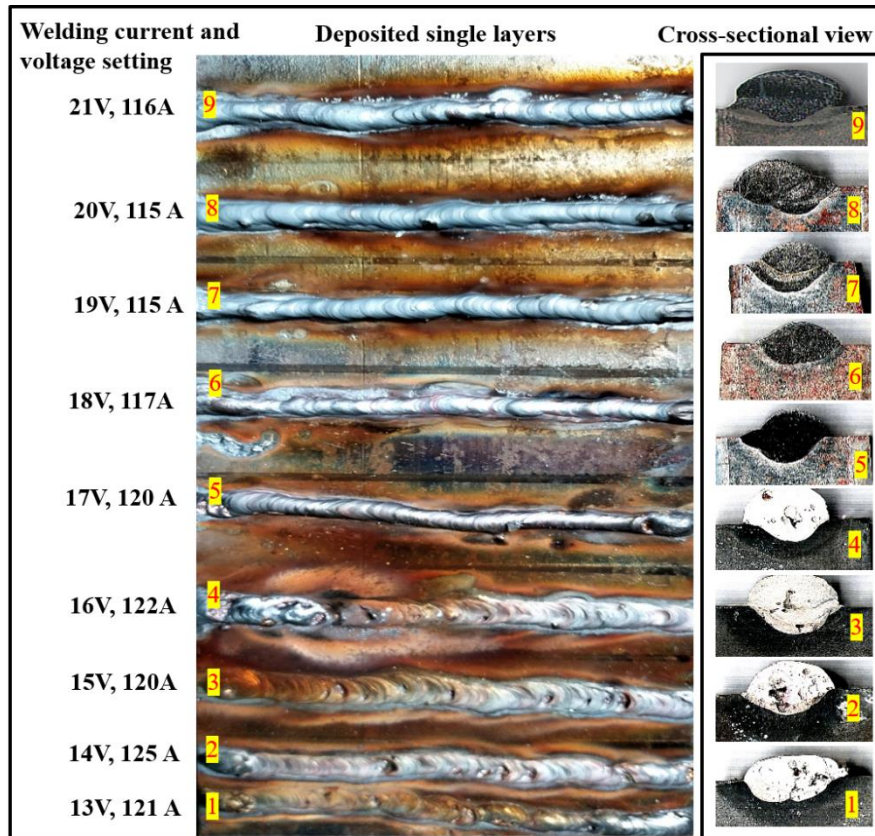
GTAW deposited single layer samples at different welding parameters and their cross-sectional view
